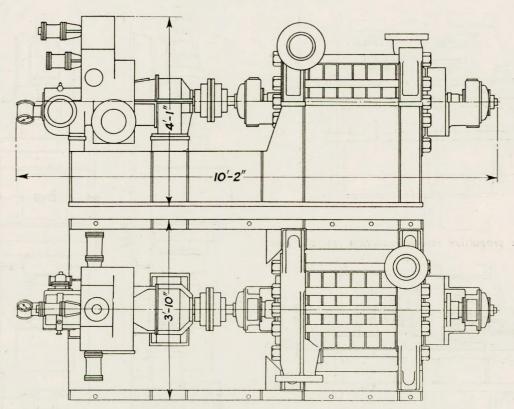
h.p. marine turbine driven pump with 14,000/3,100 r.p.m. epicyclic gear
